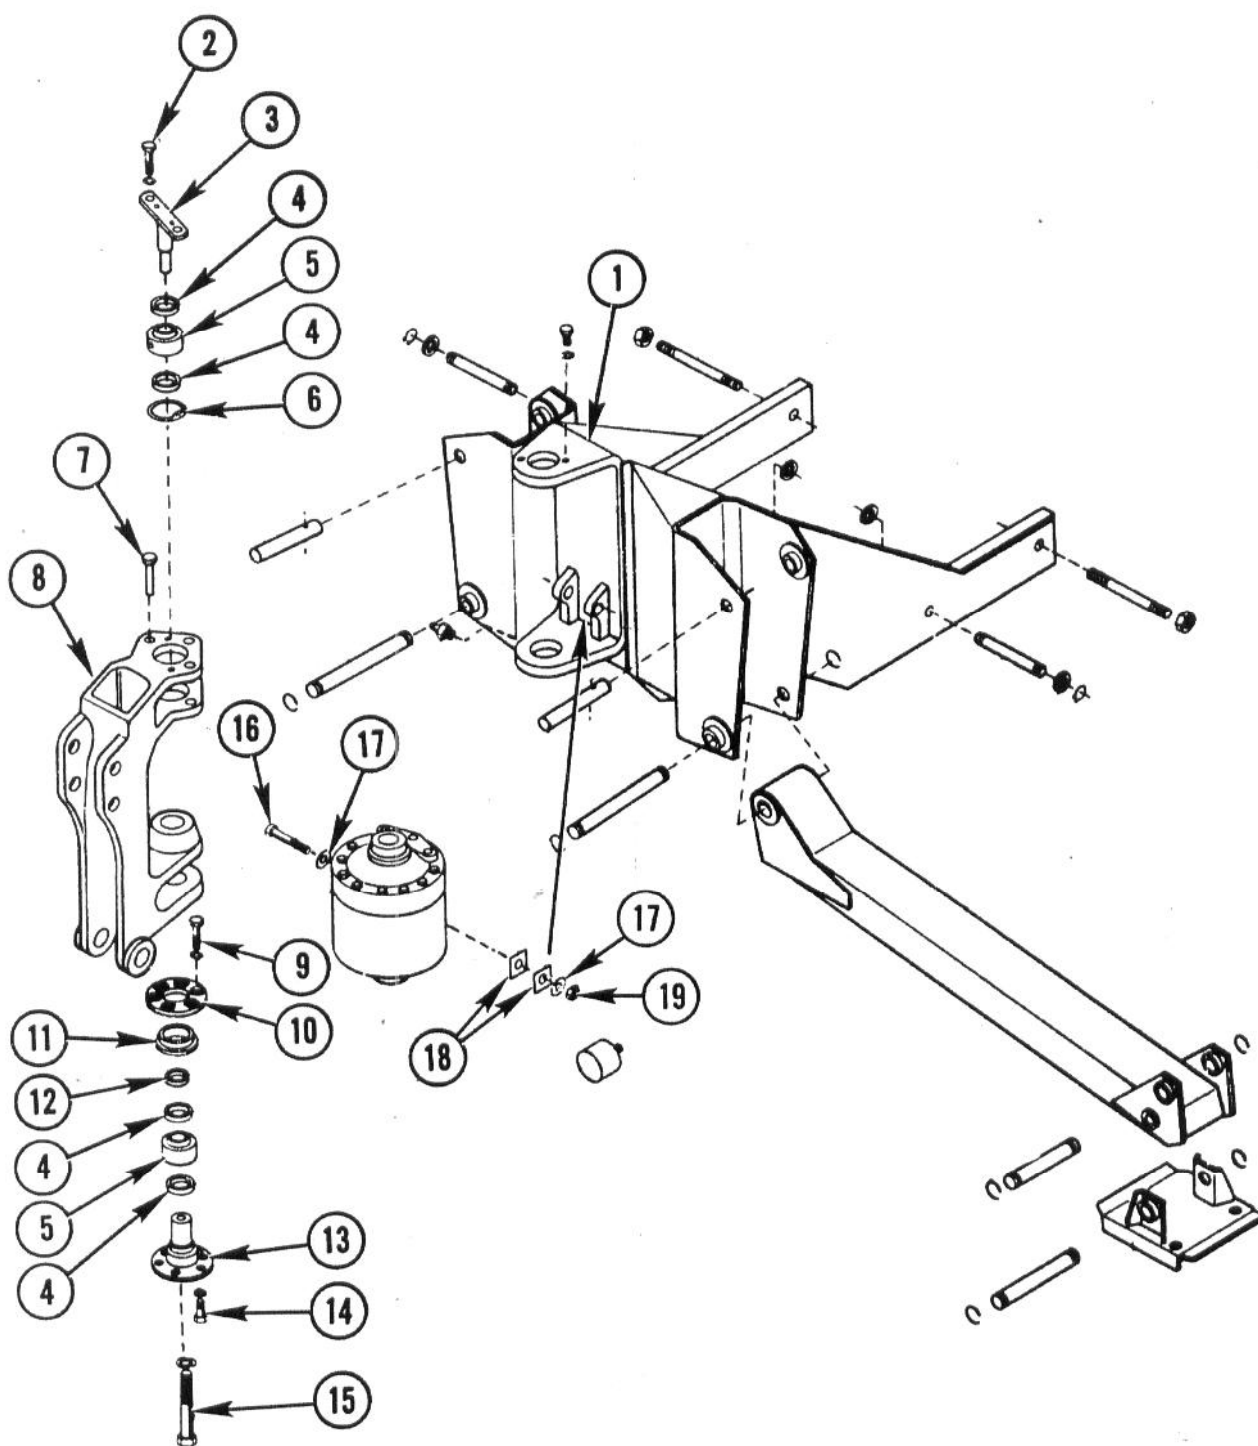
Back Frame, Pivot Casting and Rotary Cylinder
